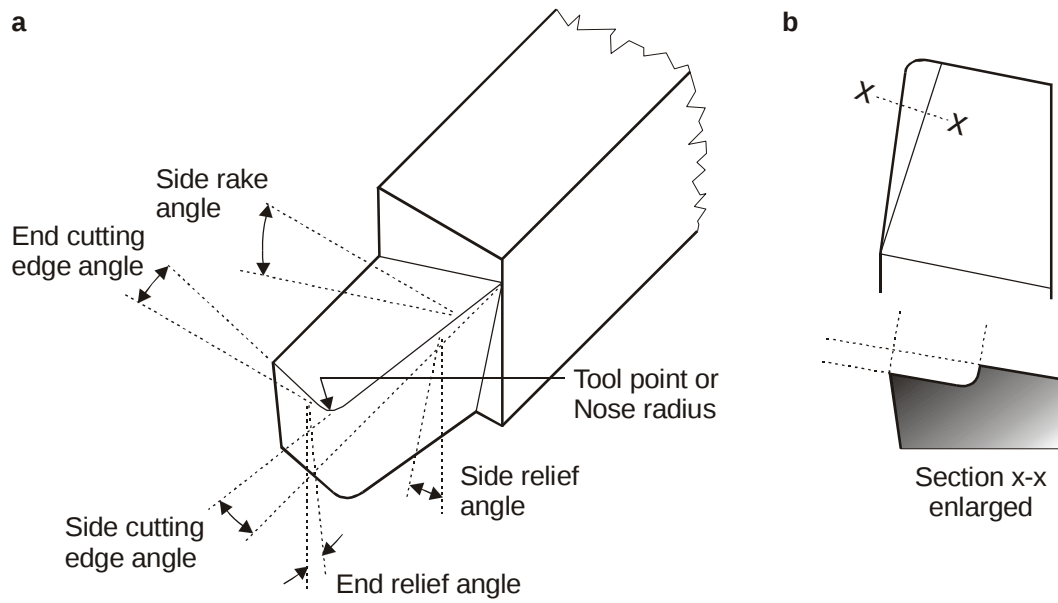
a) Dimensions of a single-point cutting tool; b) one form of chip breaker on a cutting tool designed to help the clearance of fragments. (Redrawn from Oberg *et al.* 2000.)
